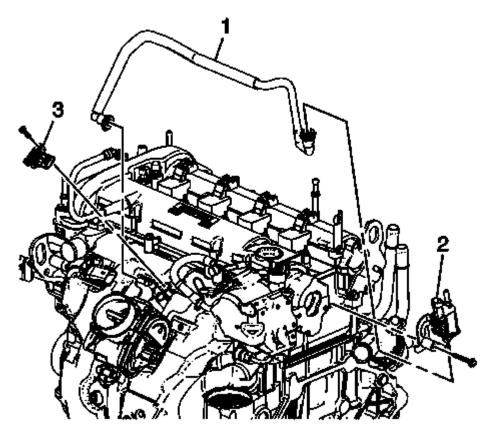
Oil Level Indicator Tube, Seal Ring & Bracket Bolt Courtesy of GENERAL MOTORS COMPANY
